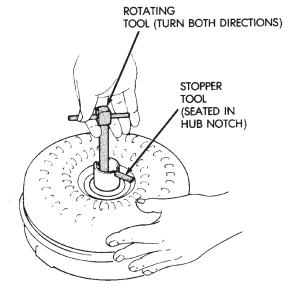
Checking Operation Of Torque Converter Stator One–Way Clutch
